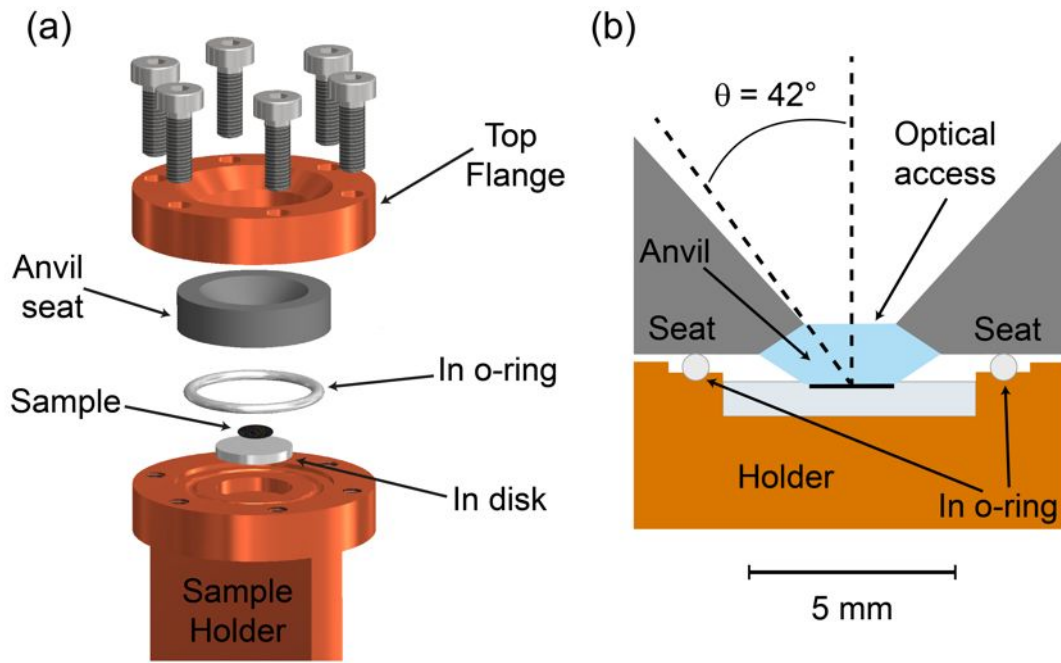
Sample holder for K_3C_{60} measurements. Panel (a) shows an exploded view of the sample holder assembly conceived for the MIR pump-THz probe measurements. The lower part of the holder, connecting to the Oxford Optistat CF-V cold finger is not shown. Panel (b) shows a zoomed sketch of the sample holder assembly after closure. The black layer in contact with the anvil is the sample pellet, while the grey disk below is the In disk.
